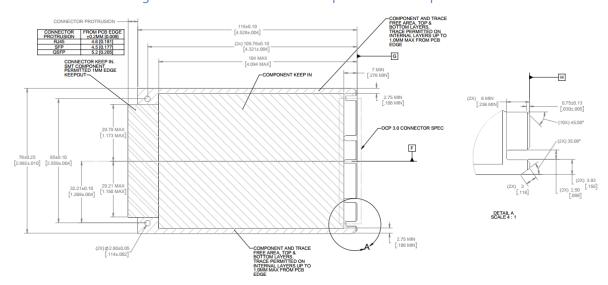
Small Form Factor Keep Out Zone – Bottom View
